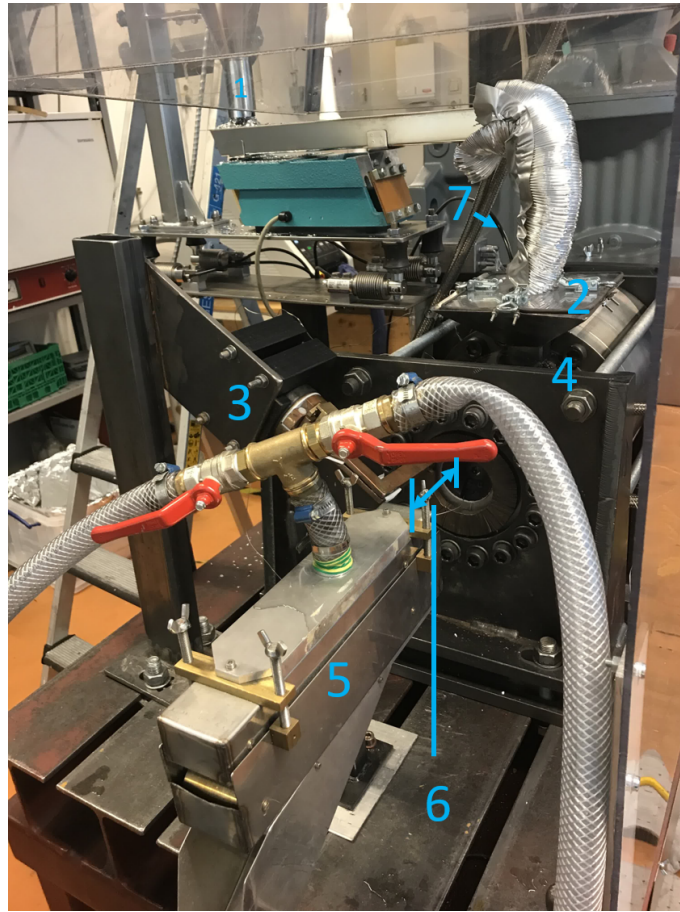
Assembled screw extruder ready prior to an experiment. 1 - feeder funnel leading down to the vibrating feeder. 2 - granule catcher into the screw extruder feeding hole. 3 - induction coil. 4 - the screw extruder. 5 - water quenching system. 6 - 30cm distance from die orifice to the water quenching starts. 7 - gas tube mounted on and flushing down nr. 2.
